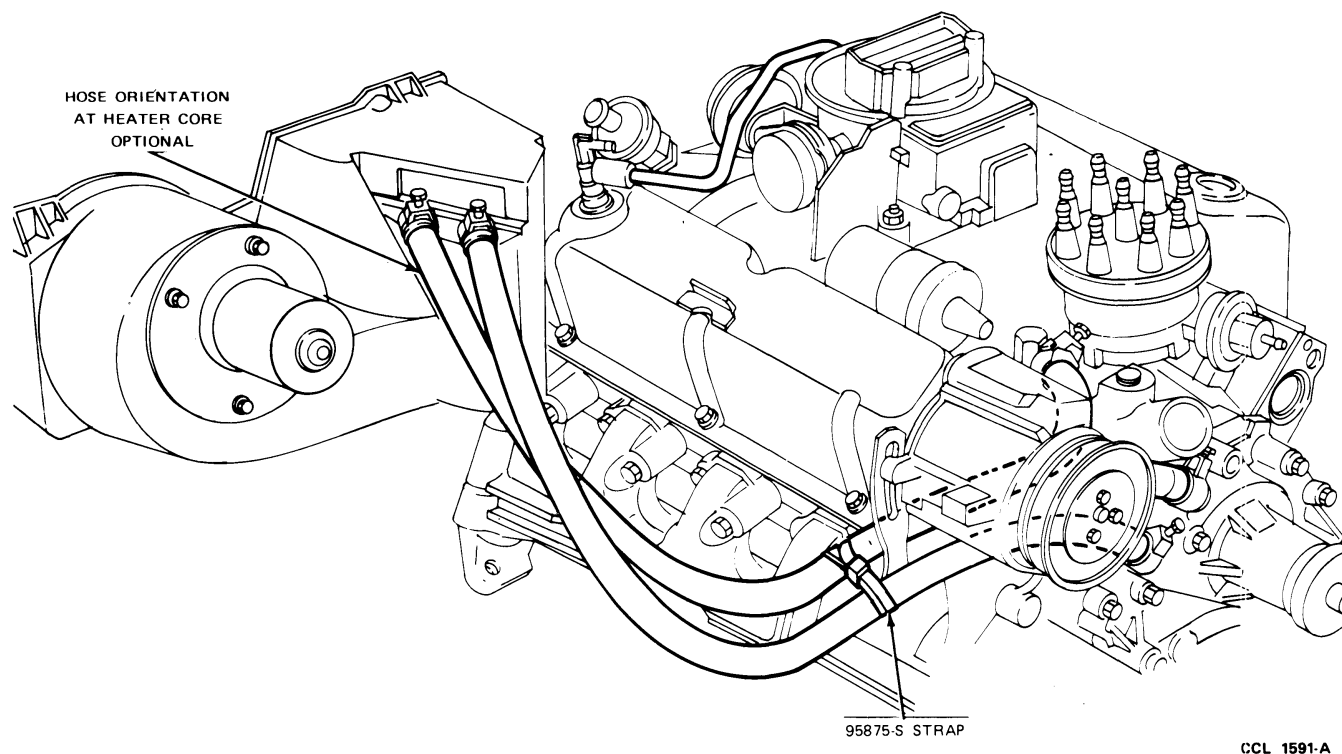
Heater Hose Routings — 5.0L (302 CID) Engine
